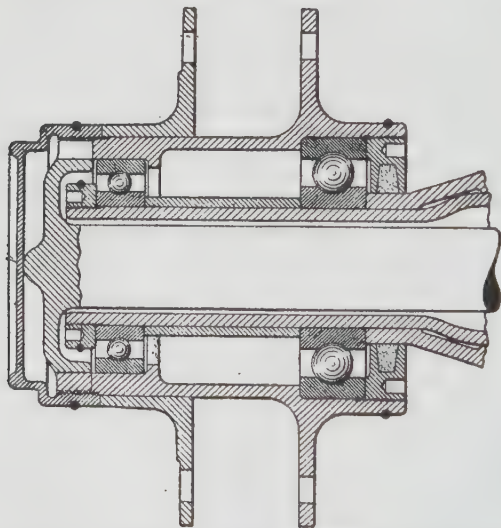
DRIVING WHEEL HUB MOUNTED ON TWO RADIAL BALL BEARINGS.
